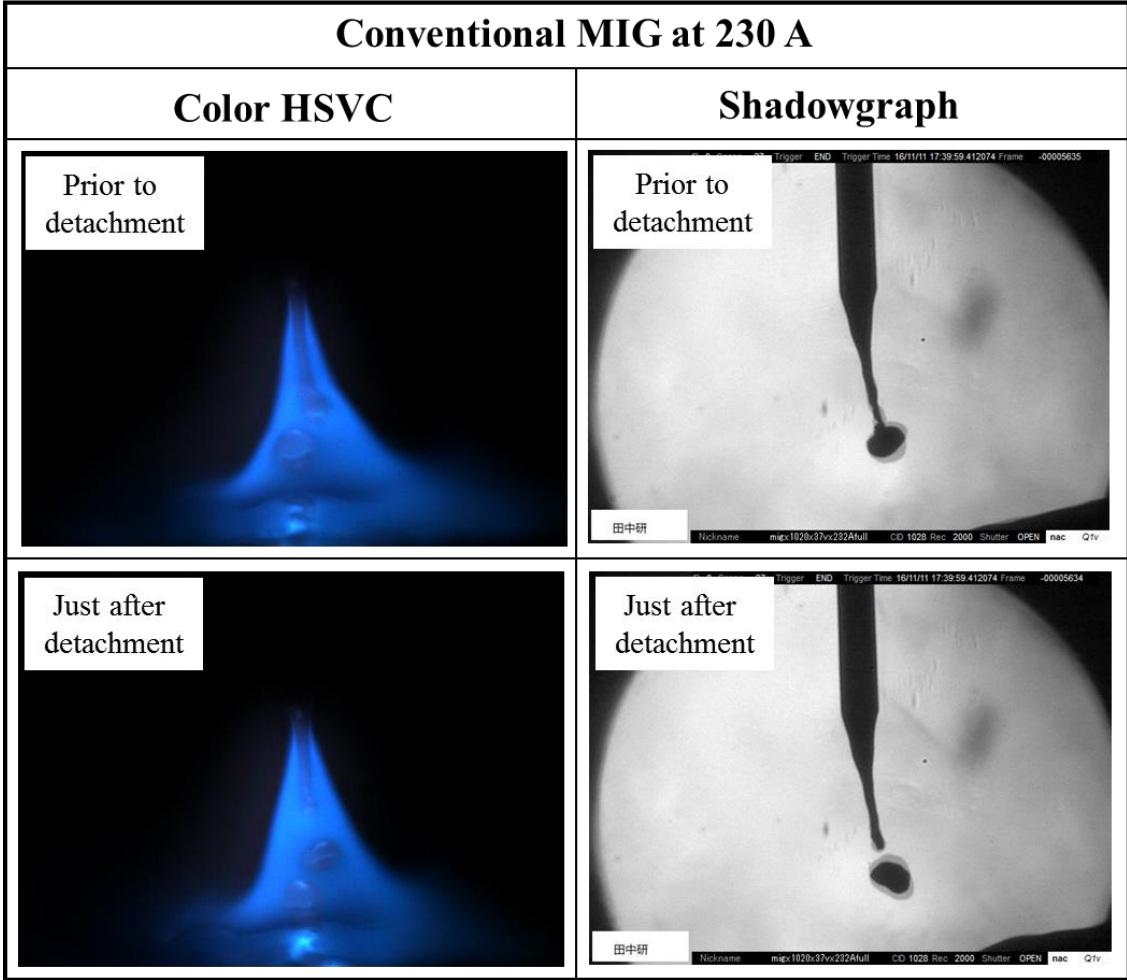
Metal transfer observation at the moment of droplet detachment at 230 A in conventional MIG welding by color HSVC and shadowgraph method
